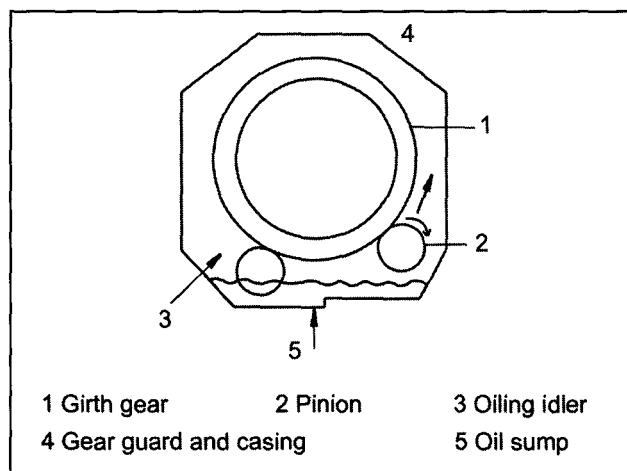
Kiln - gear lubrication by oiling idler.
